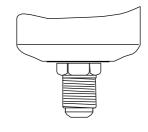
Style 50 (incl. valve depressor mounted into machined flare)
